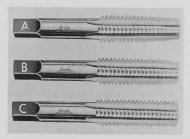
Set of taps. (A) Taper; (B) Plug; (C) Bottoming.
